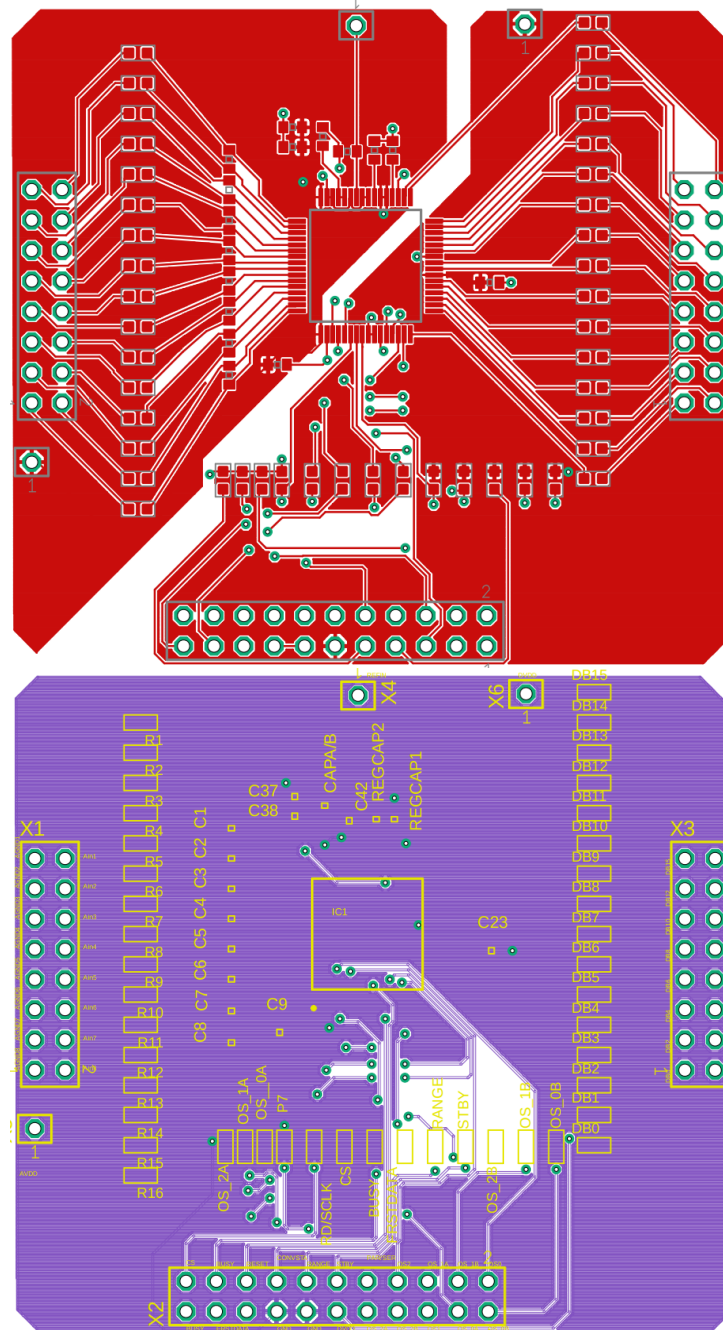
ADS8885S breakout board layout, top (Red) and bottom (purple) layers. Layout by Daniel Hobbs.
